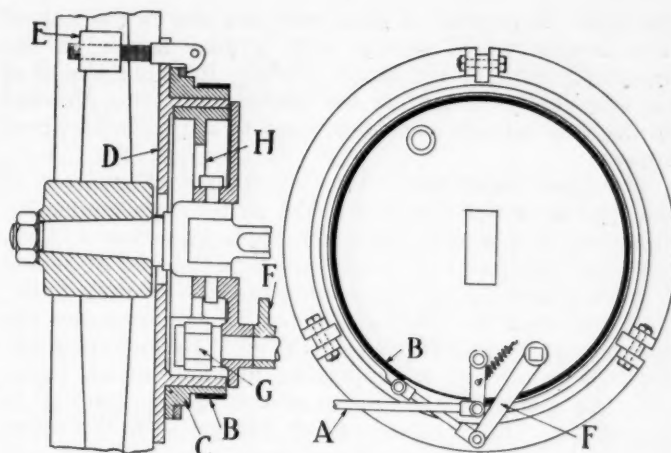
Hallot servo brake for front wheels in which locking of the wheels is automatically prevented
